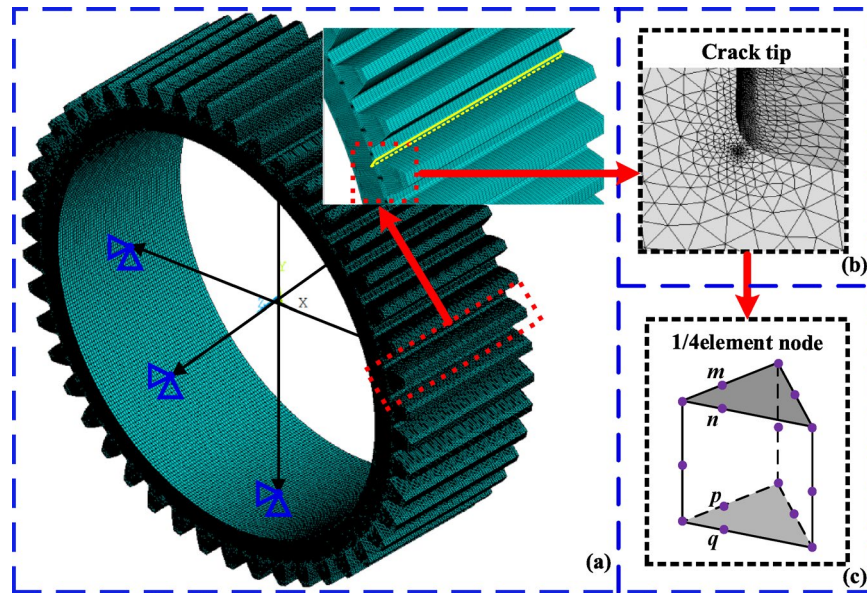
FE model of the driving gear with a crack: (a) the driving gear; (b) a single tooth with an initial crack; and (c) standard six-node triangular element
